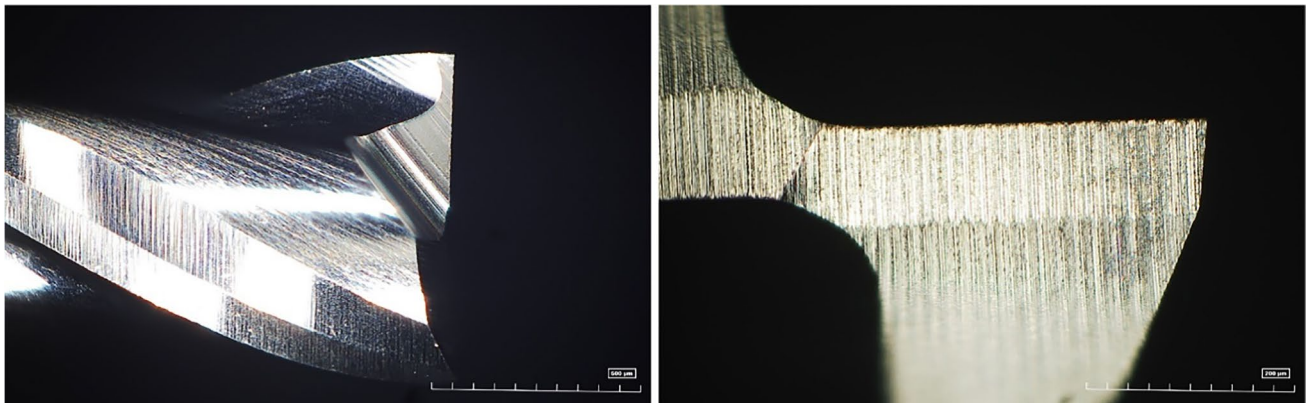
The RIME HM79/05 tool employed for micro-milling tests
